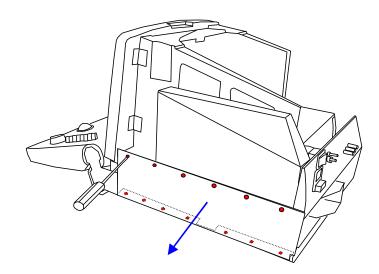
1-16. Screws holding the metal cover for the PC boards
